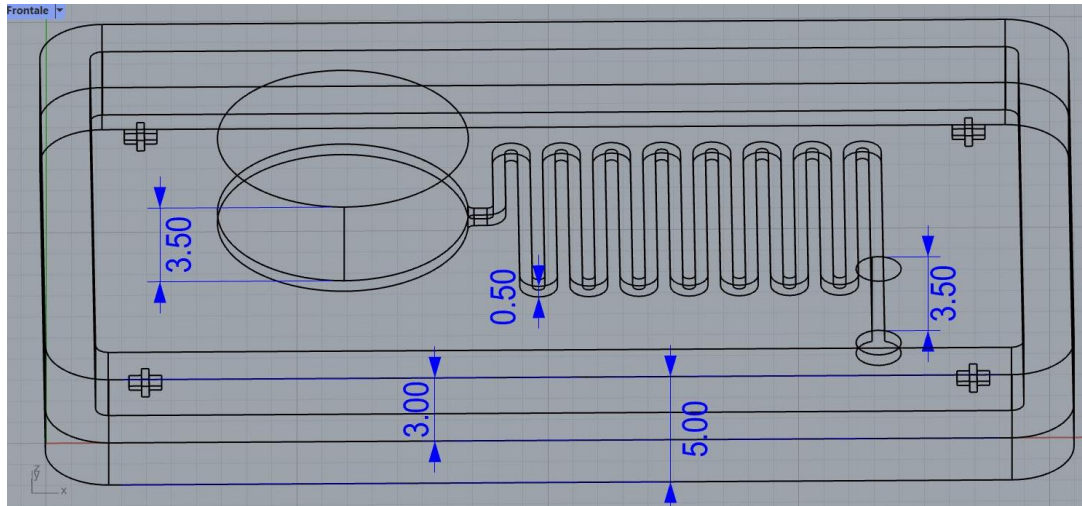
Front view of the 3D drawing with dimensions of the extrusions in millimeter scale
